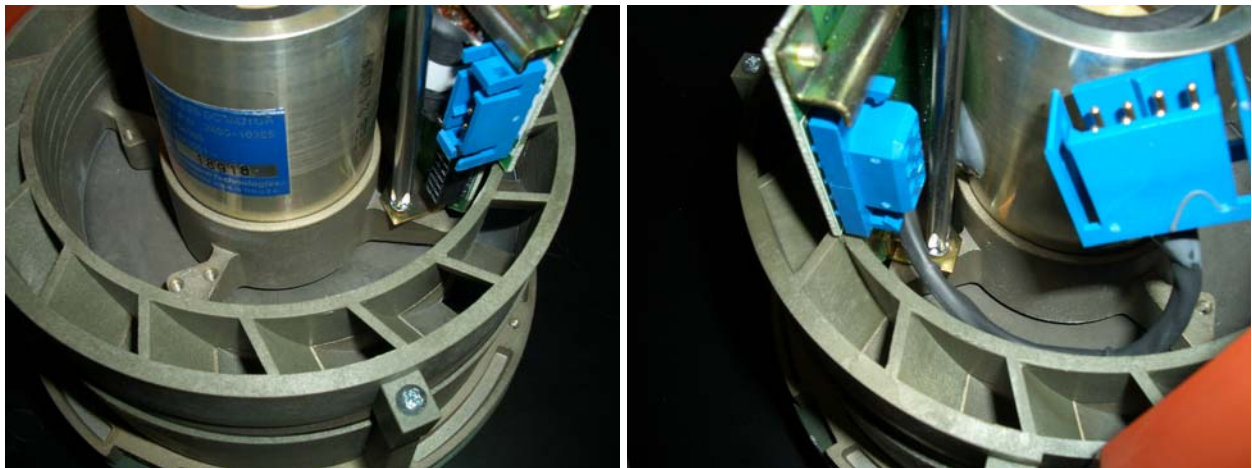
Detail, Vent Fan Driver Board Screw Locations
